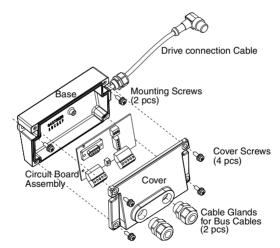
Exploded view of the CFB-RS Adapter Module
